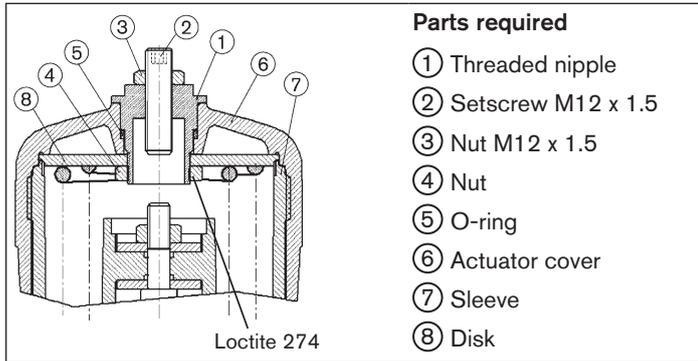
Actuator size 100, 125 (Ø in mm),
